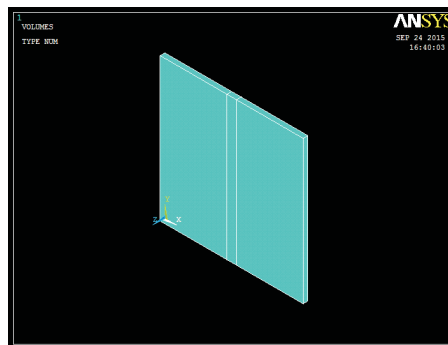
Weld plate model using ANSYS for AA7075 weldments
